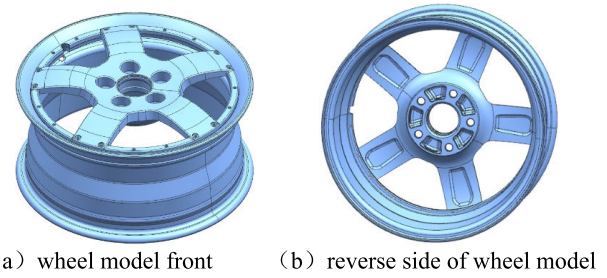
3D model of assembled wheel after multi-objective optimization design.
